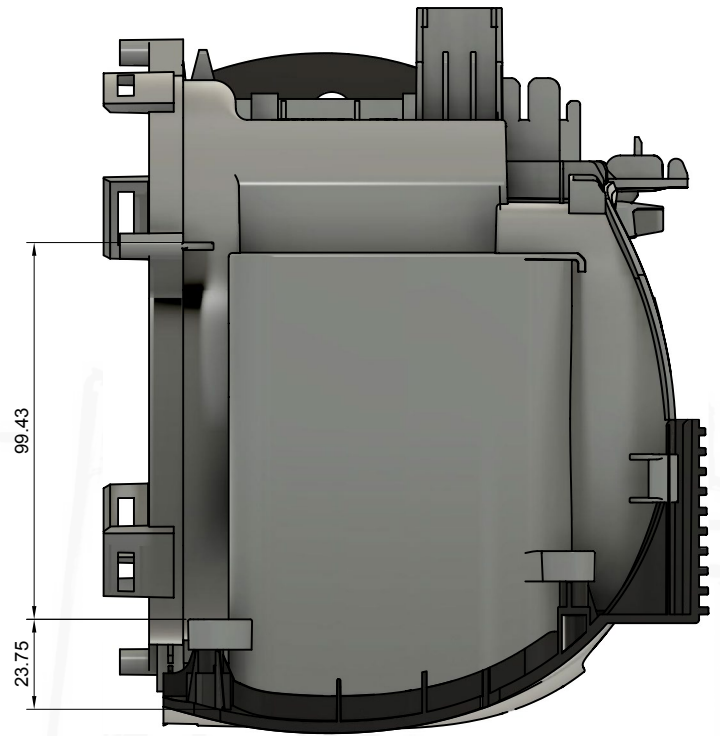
, Lower housing screw pole dimension and distance between screw hole and top surface in the current design
